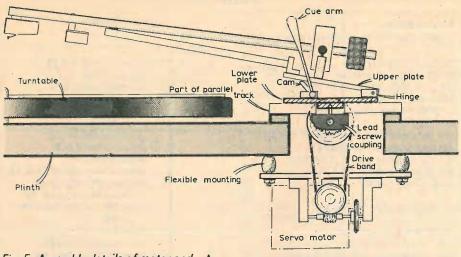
Assembly details of motor and 100 to one speed reduction (lower portion) are left to individual constructors. Upper assembly is detailed in drawings and Figs. 3 & 4.
